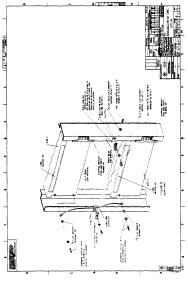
Sample of An Arrangement Drawing (Sheet 5 of 5)
